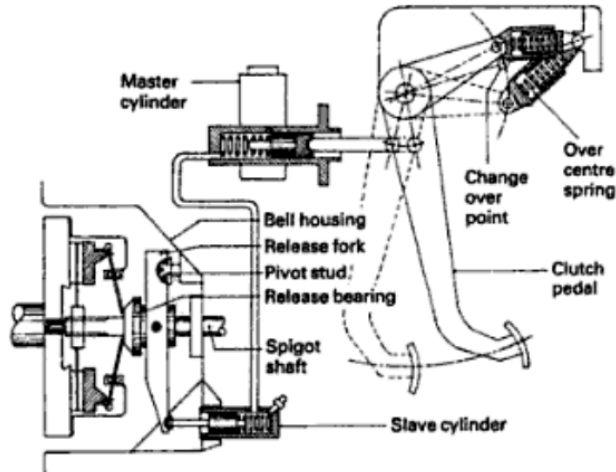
Clutch hydraulic control system with over-centre spring [8]
